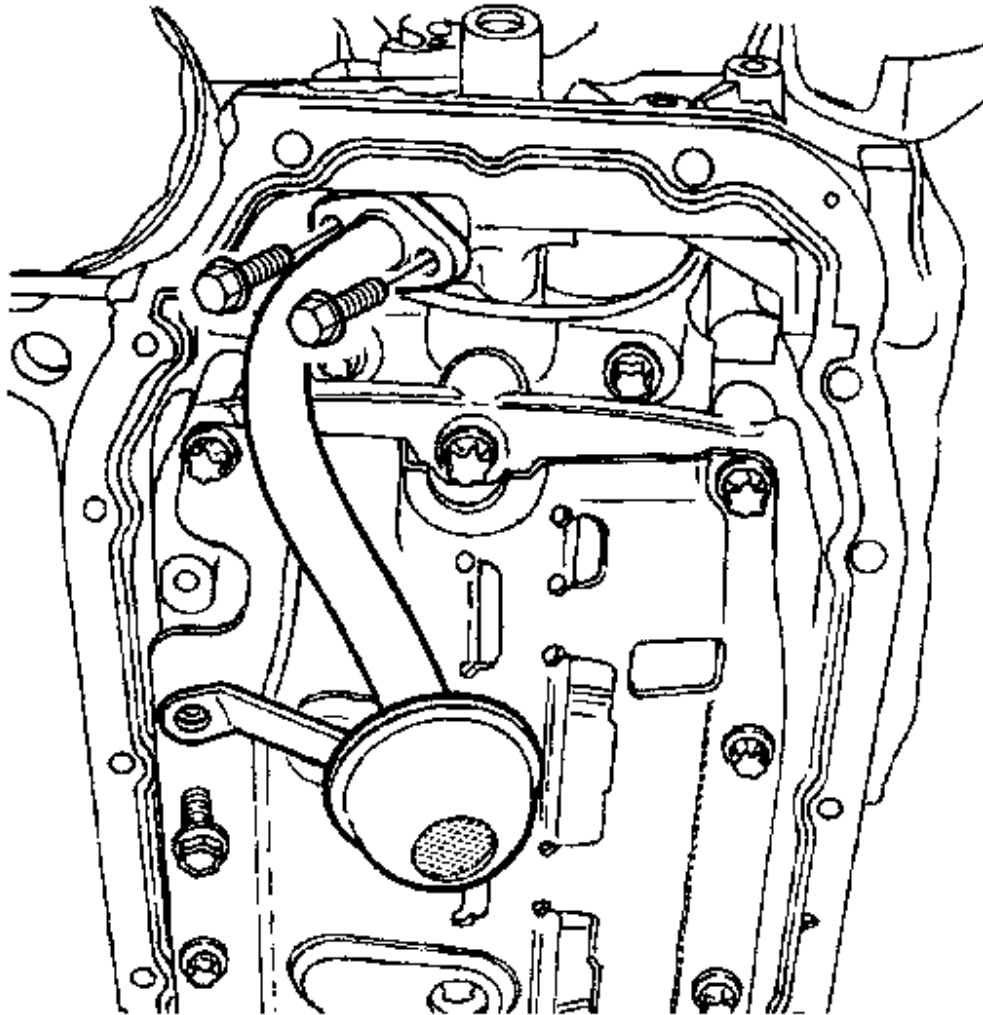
View Of Oil Suction Pipe, Bracket And Bolts
